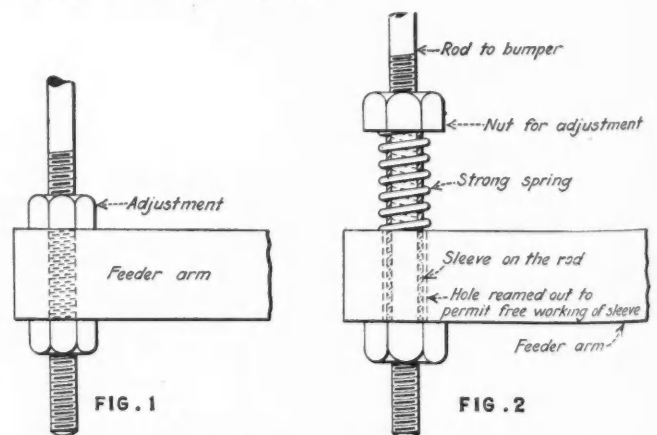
Ore feeder arm of rigid type. Fig. 2—Improved ore feeder arm designed to avoid shock
